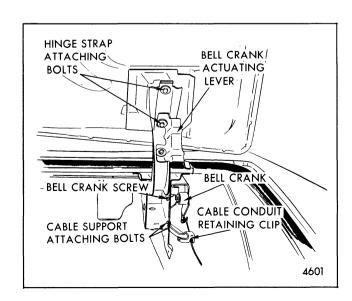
Mechanical Pull-Down Unit Hydraulic Cylinder Cable Attachment - Cadillac Styles
